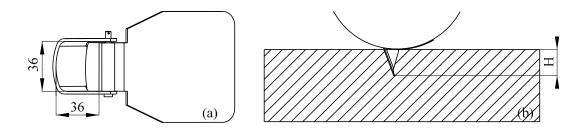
Structure drawing of the cavitation device: (a) the bottom surface of the hole-forming device and (b) diagram of the depth of the hole-forming device.
